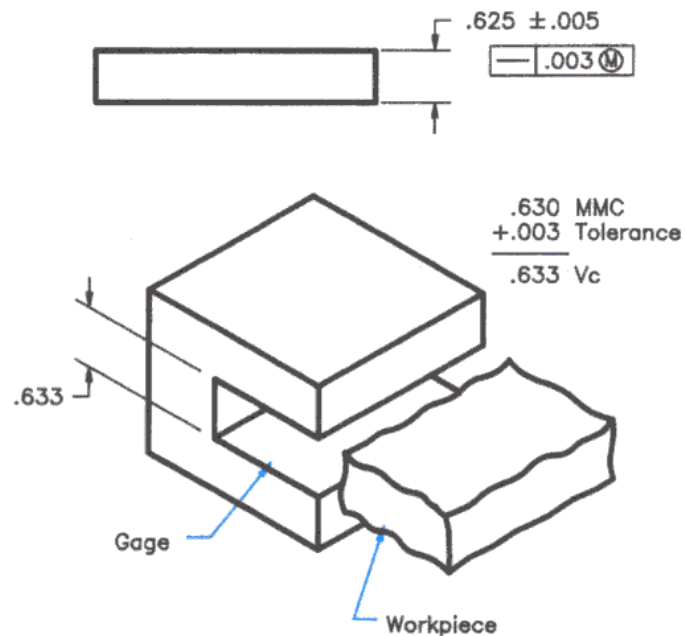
Flatness applied to control the center plane at MMC can be verified with a functional gage.
